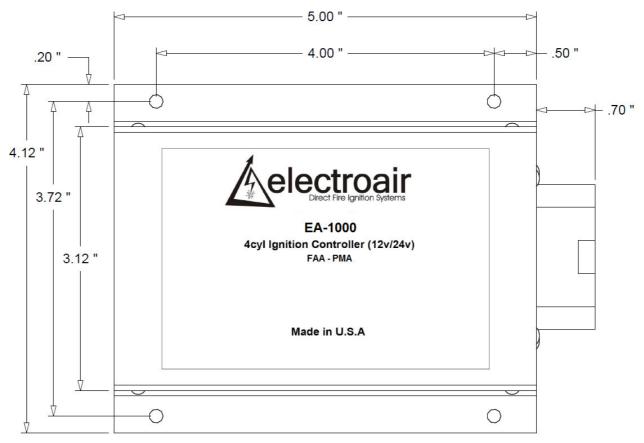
P/N EA-1000 Overall and Hole Dimensions
